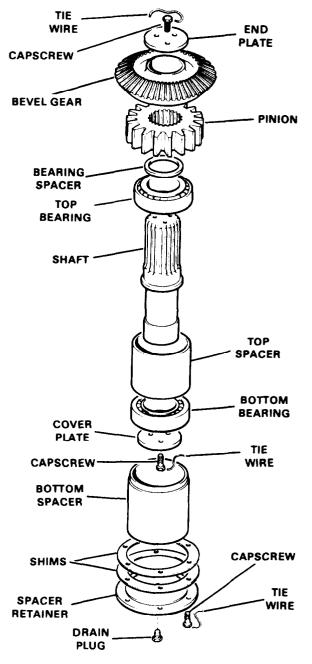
C-1. Intermediate Swing Shaft (9210J60-3)
